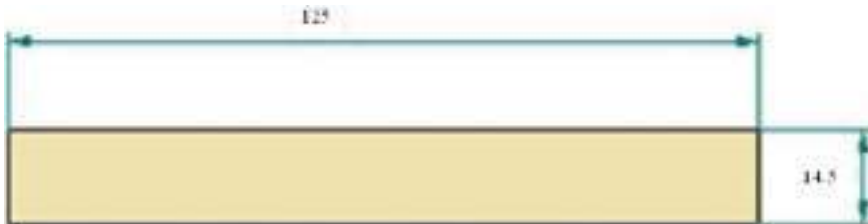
Dimensions of flexural test specimen as per ASTM D790 (in mm)
